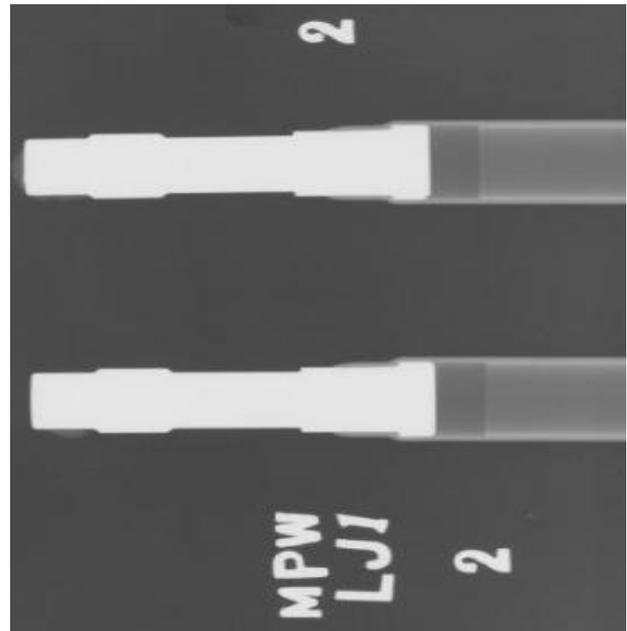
Al/Cu Weldment specimen subjected to radiography
